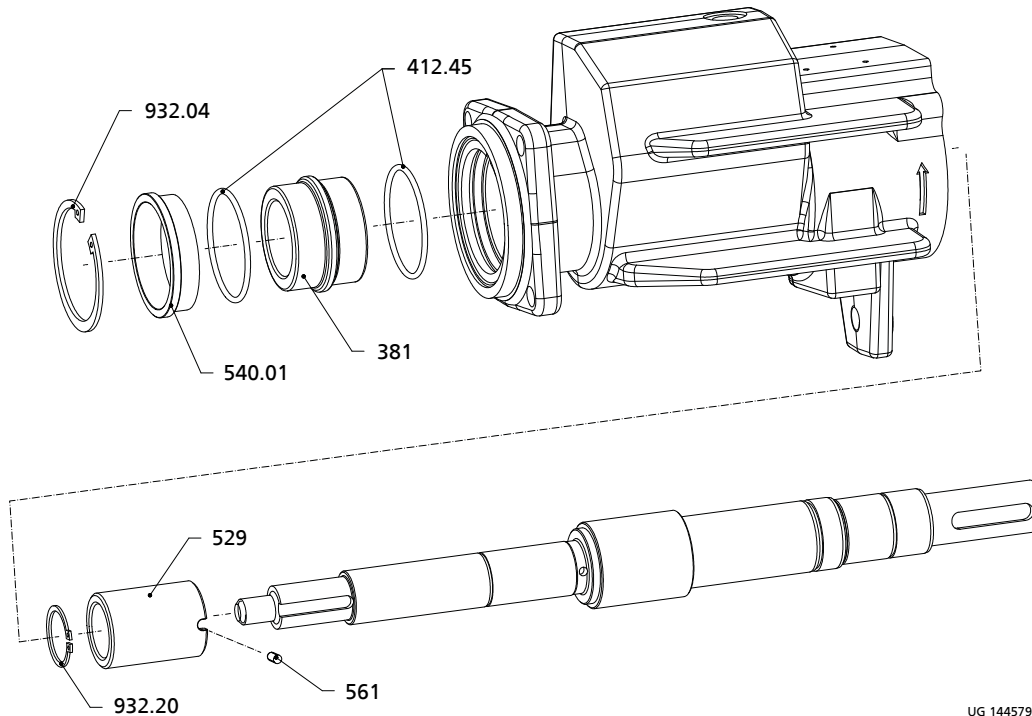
Exploded view of an Vlety, bearing brackets WS\_35\_LS / WS\_55\_LS with double mechanical seal
